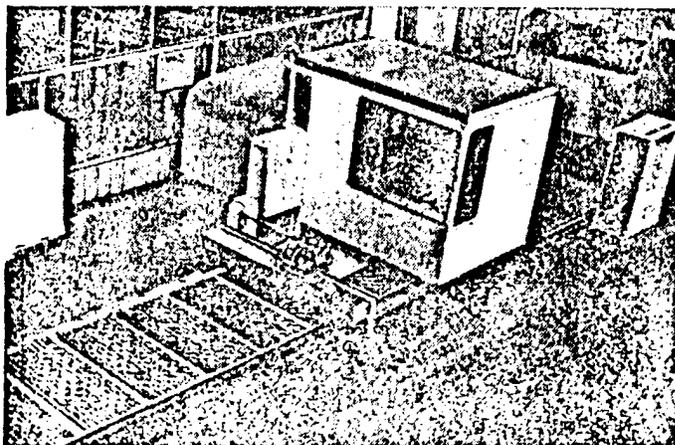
General view of the "Biryuza-2" laser cutting machine.
